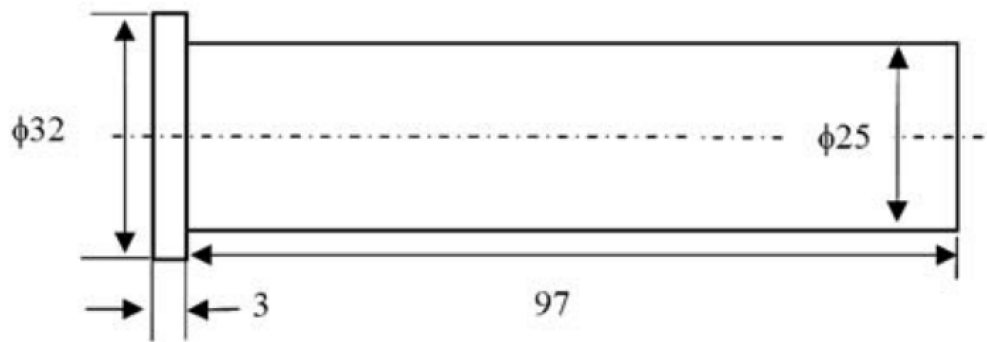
5 Dimensions of Jominy end quenching specimen.
